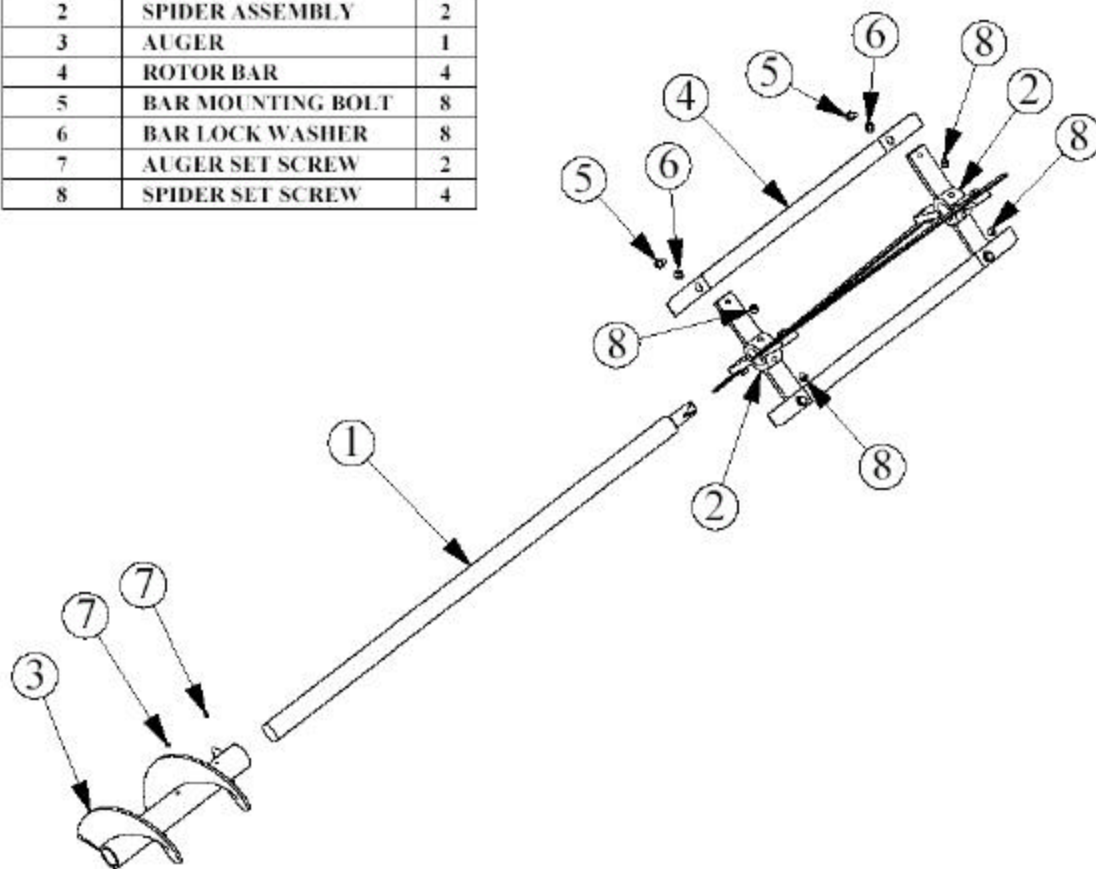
RS 700-700S/1500 Standard Rotor Exploded View
